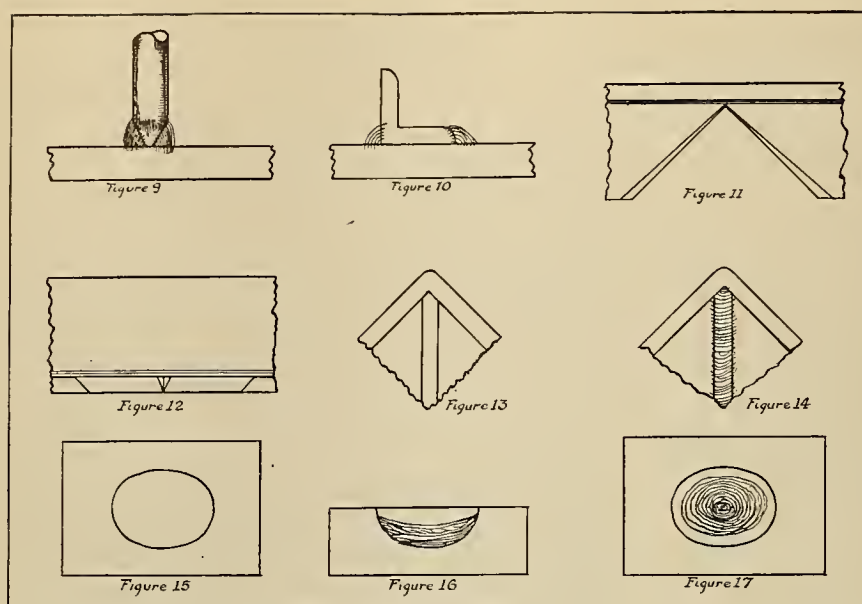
shows a method of welding a stud to a plate, Fig. 10—an angle welded to a plate. Figs. 11, 12, 13 and 14 show a method of welding the corner of an angle. The usual 90° angle is cut from one leg (Fig. 11) and beveled about 45° (Fig. 12). It is then heated and bent (Fig. 13) and welded (Fig. 14). Figs. 15 to 17 show a method of filling a hole.
